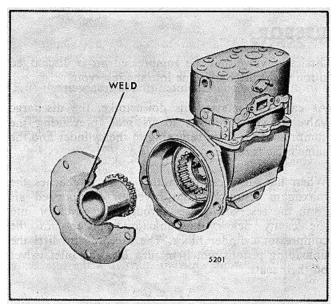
Fixture for Holding Drive While Installing or Removing Slotted Nut
